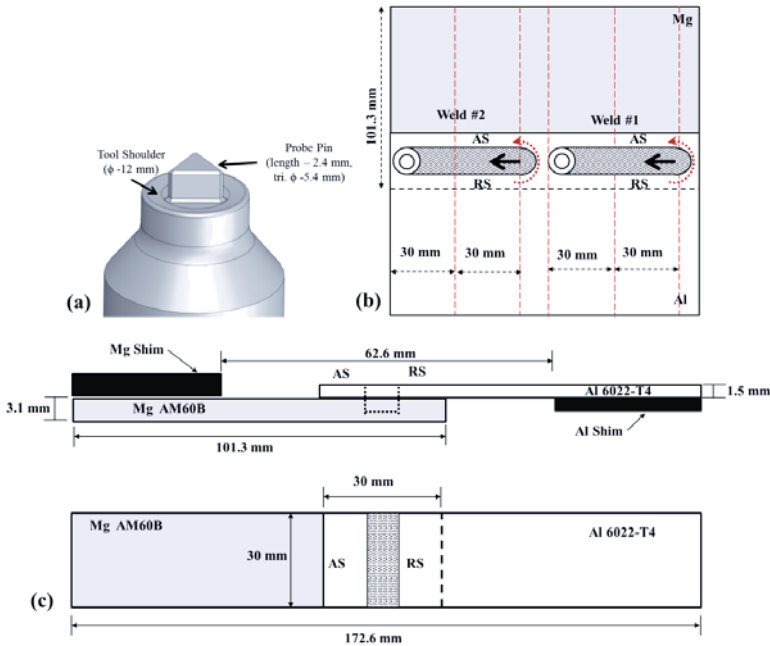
Representations of (a) the FSLW tool profile, (b) the FSLW methodology indicating the tool traverse direction, tool rotation direction and geometrical dimensions of the materials used, and (c) the geometrical dimensions of the FSLW test coupon after water-jet cutting.
